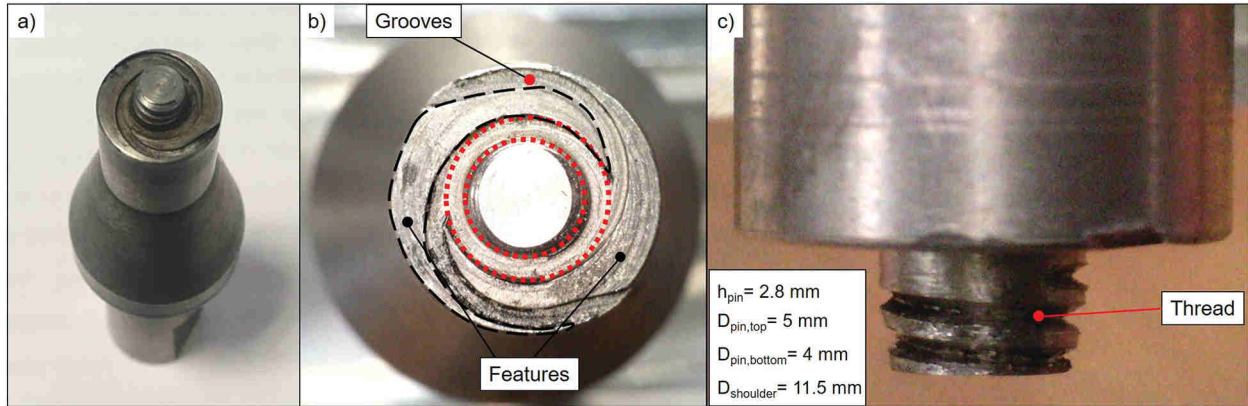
FSW tool: a) 3D, b) top and c) front views.
